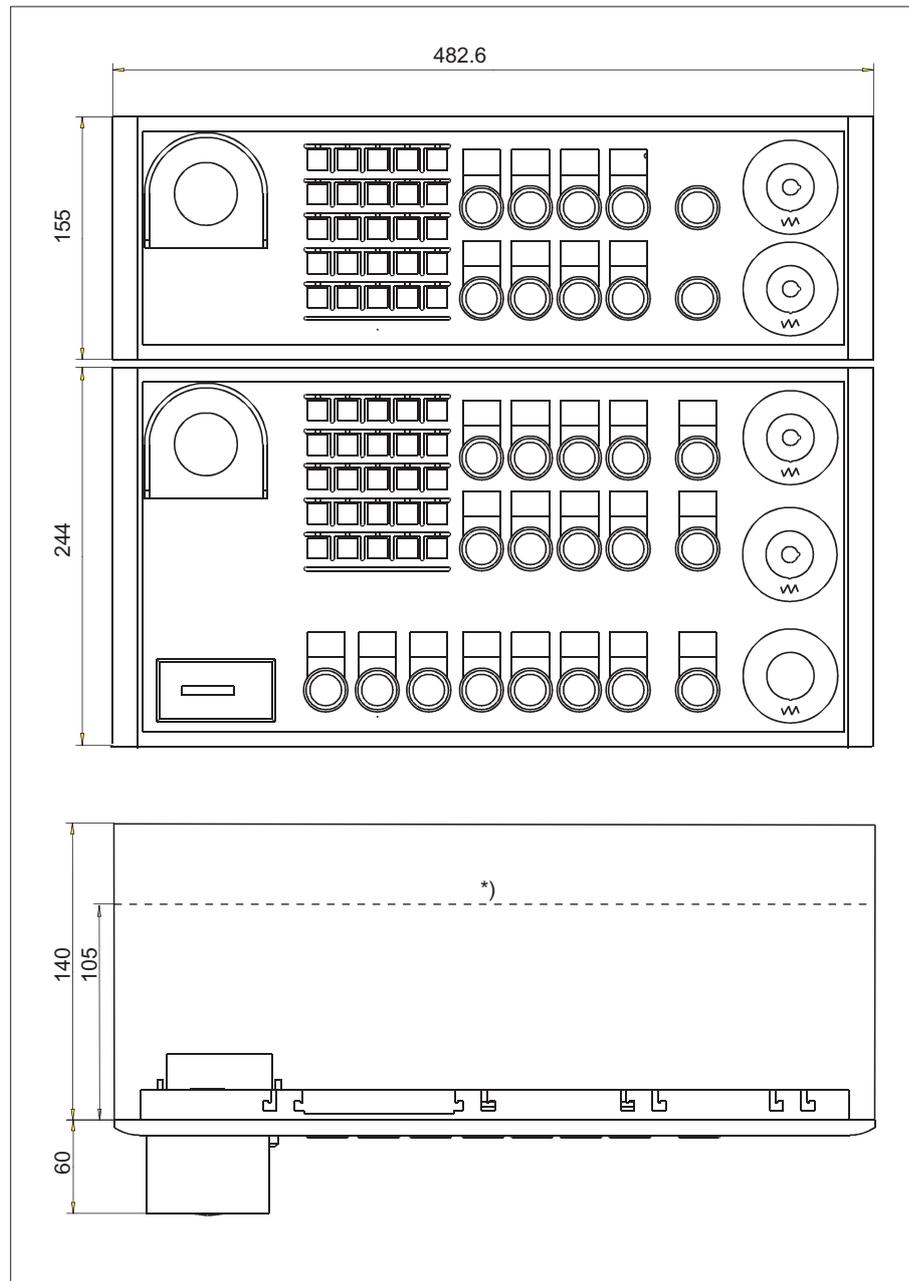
Dimension drawing for MPP 483 and MPP 483 L
